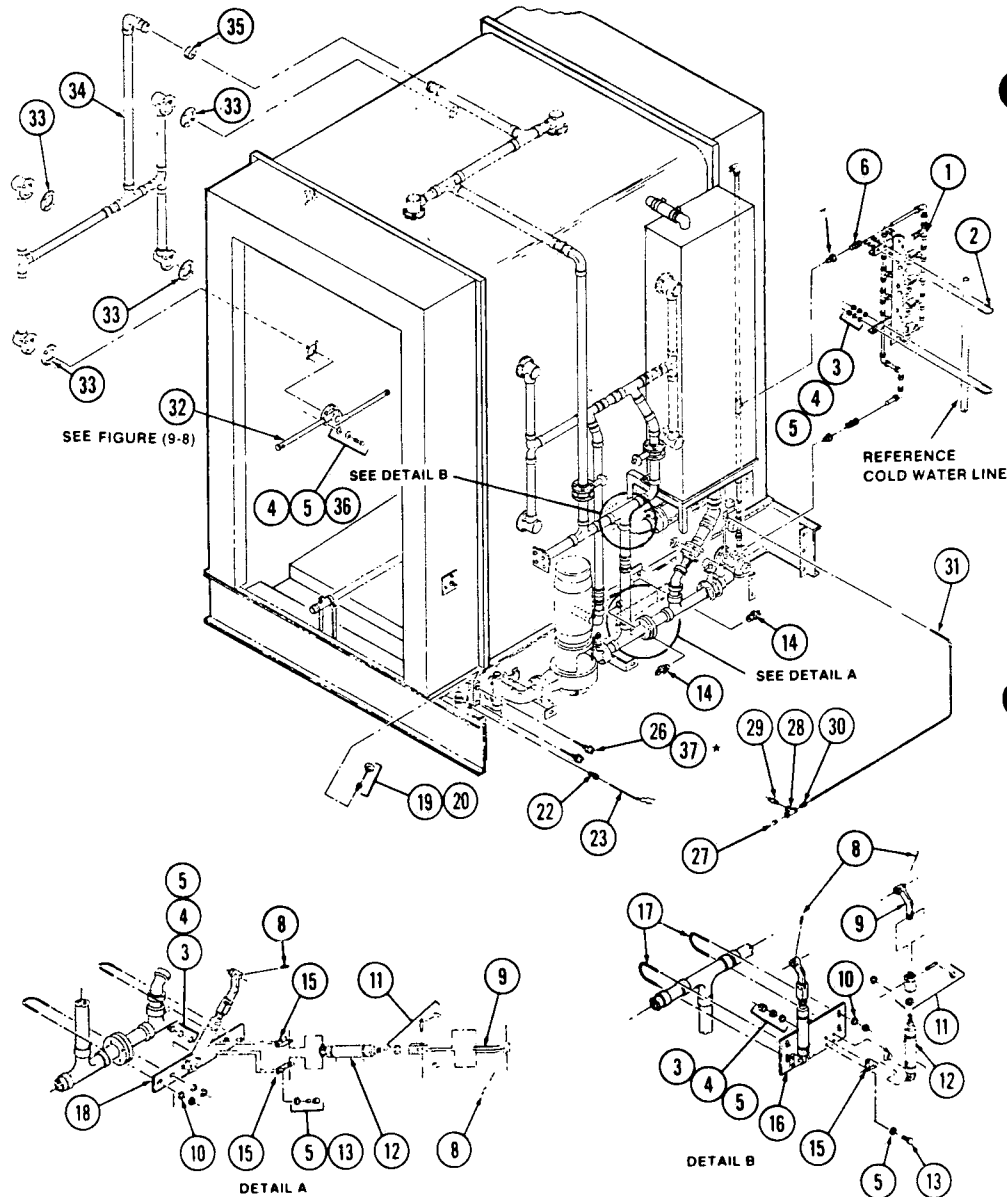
PIPING: Solenoid Actuator Assembly, Butterfly Valve Actuators, Non-Service Side Spray Manifold.
